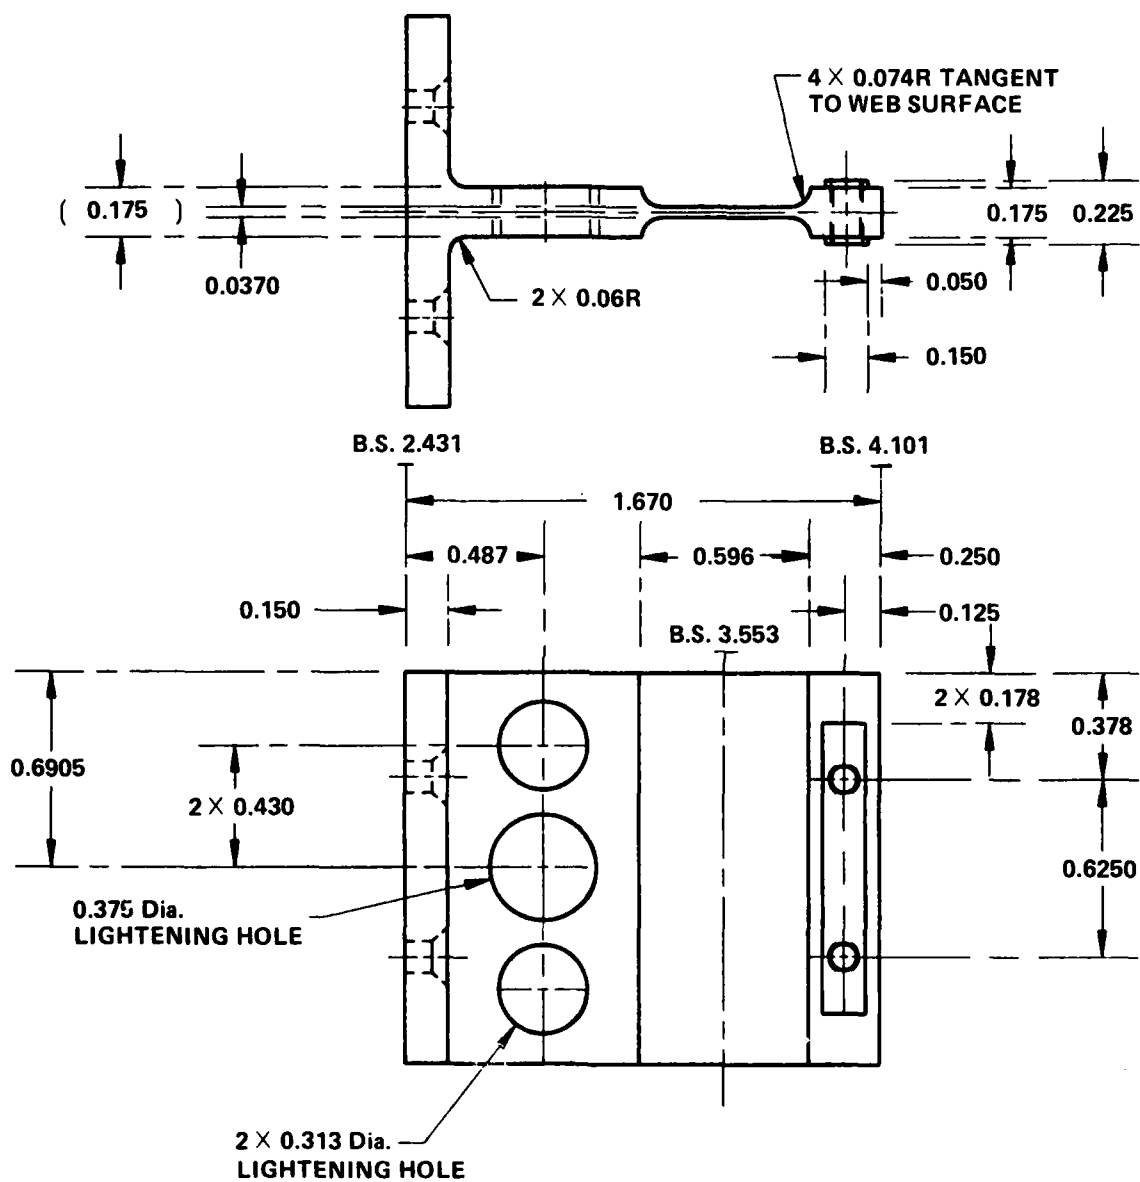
Lead-lag flexure; 17-4PH H900 steel; dimensions in inches.
